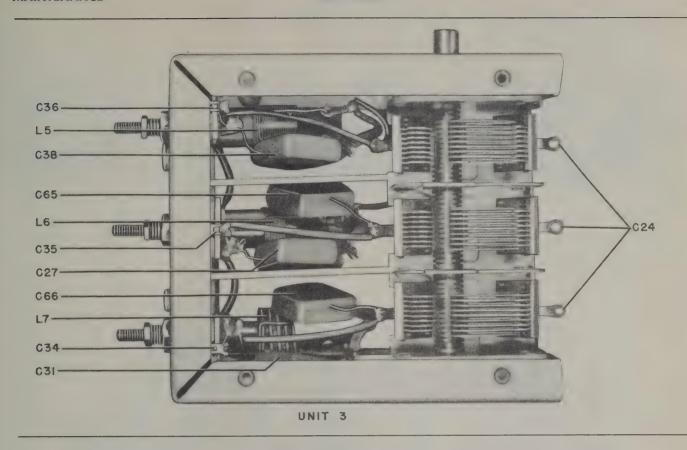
Radio Frequency Oscillator O-165/UR, Multiplier Tuning Assembly, Right Side
